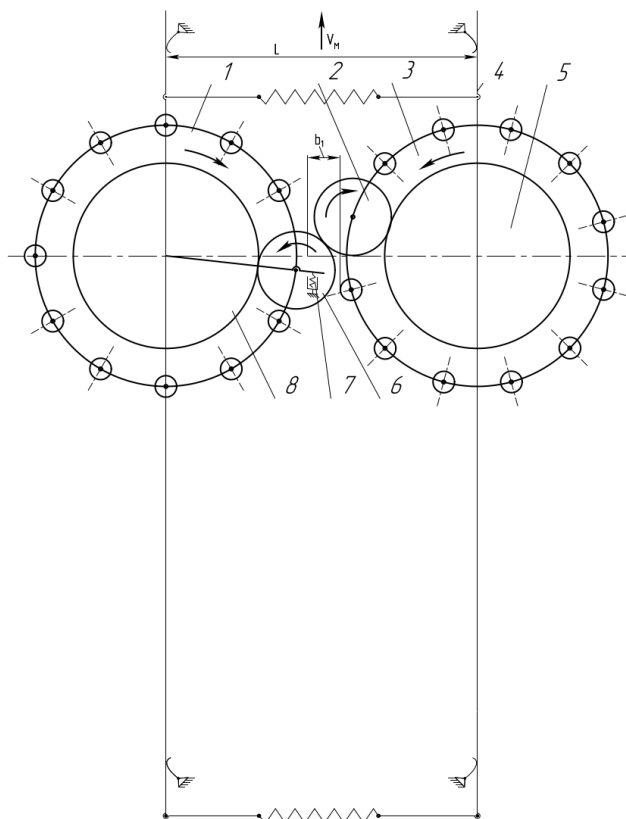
Diagram of the recommended drive for one pair of spindle drums: 1-left drum; 2-gear on the rotor of the vertical electric motor; 3-right drum; 4-fixed frame of the right drums; 5-gear of the right drum; 6-idler gear; 7-spring; 8-gear of the left drum.
